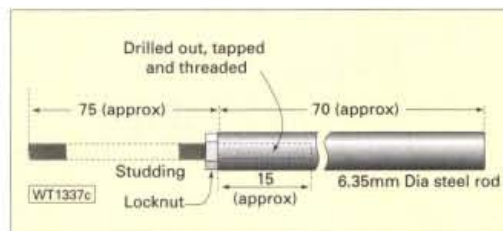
The most difficult part of the whole project is the winding shaft. For this a piece of 6.35mm steel axle rod 70mm long, drill a 3mm hole about 25mm deep has to be cut and tapped with a 4BA thread. This can only be done in a lathe (see text for advice on this matter).
